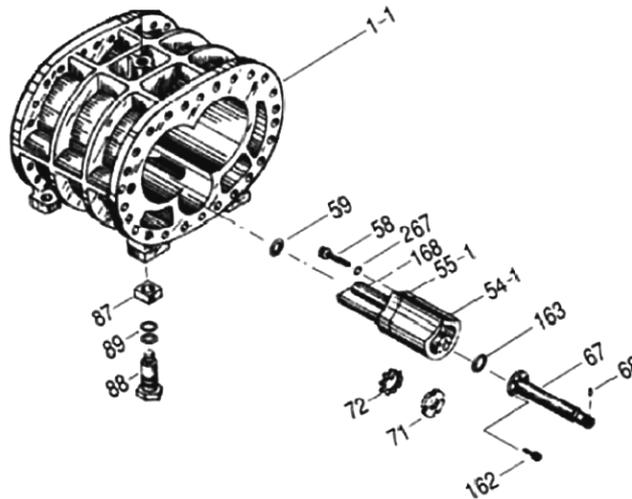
Unloader Slide Valve Assembly and Guide Block
